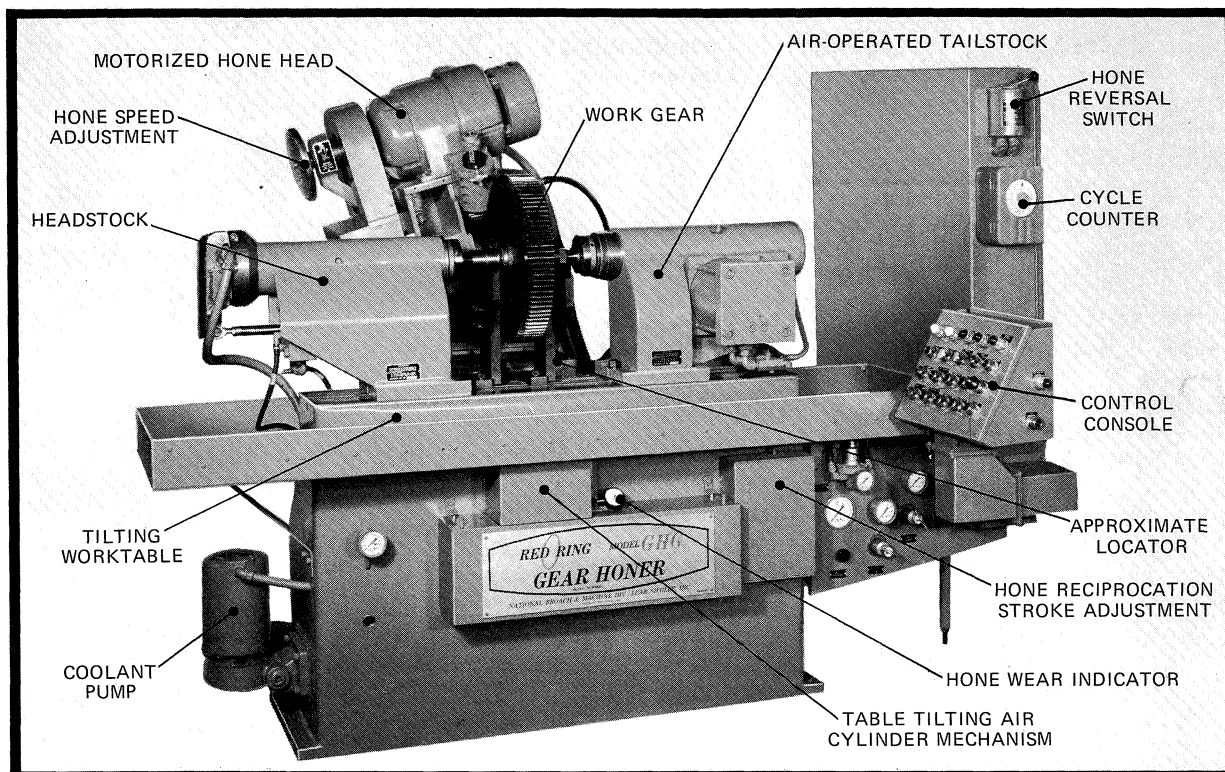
Operating components of a 24-in. gear tooth honing machine.
